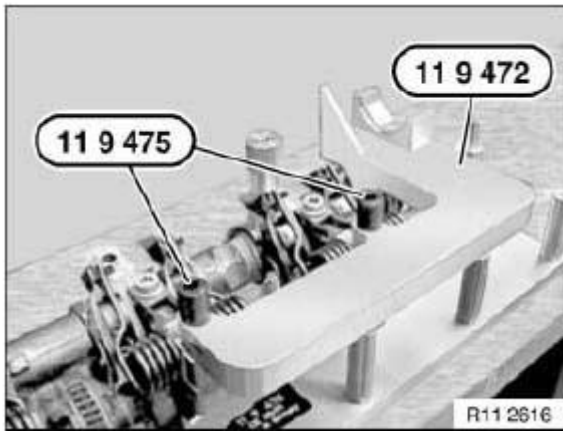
Identifying Special Tools (11 9 475) And (11 9 472)
